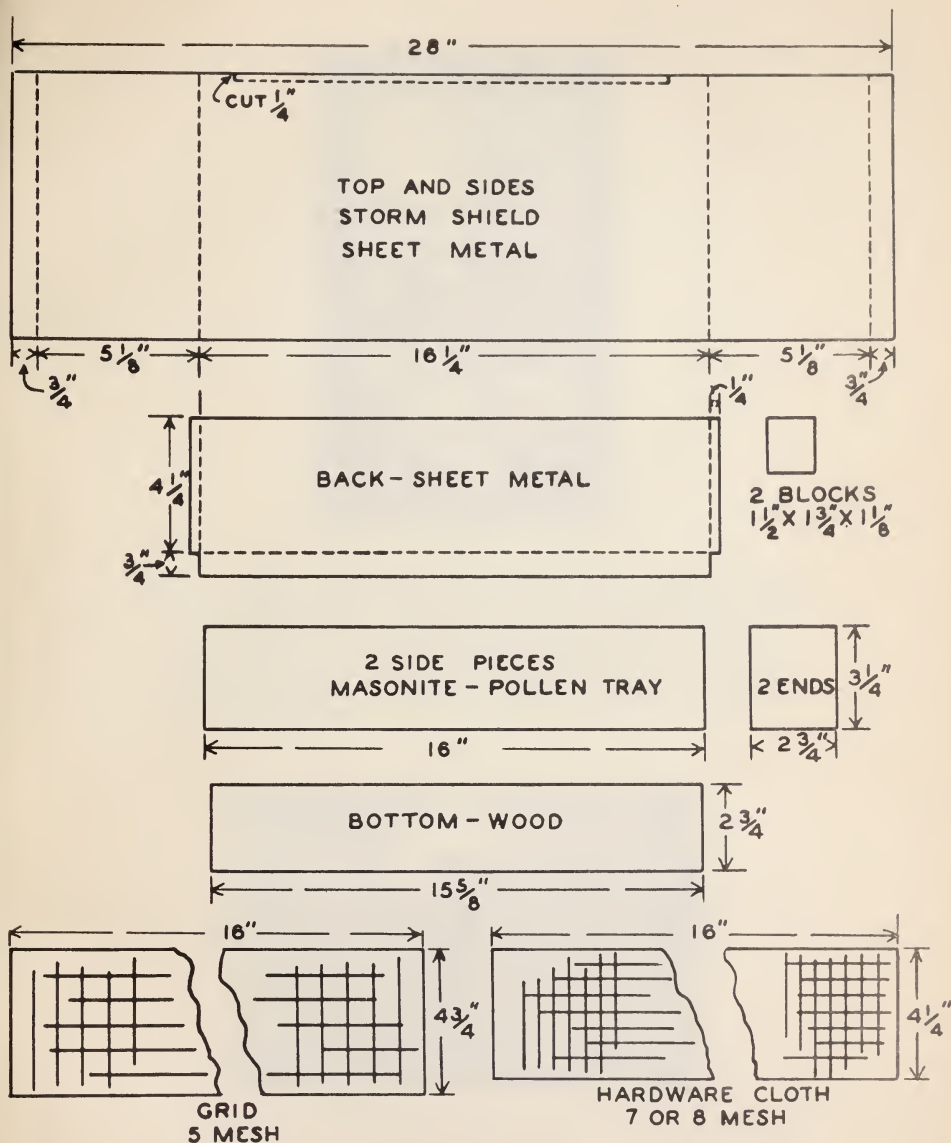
SHAPE AND DIMENSIONS OF PIECES NEEDED
